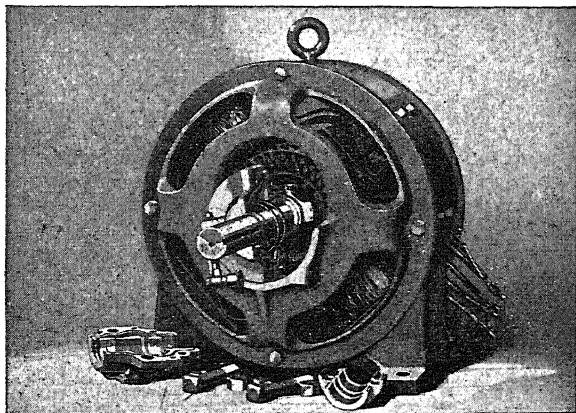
Reliance motor construction 12.* Lower section of split bearing housing partially rotated.
